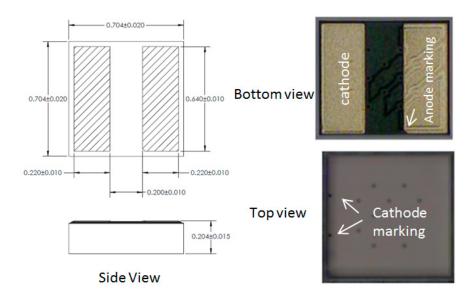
Mechanical Dimensions, LUXEON FlipChip Royal Blue LOF2-Bxxx0500yyyy1.
